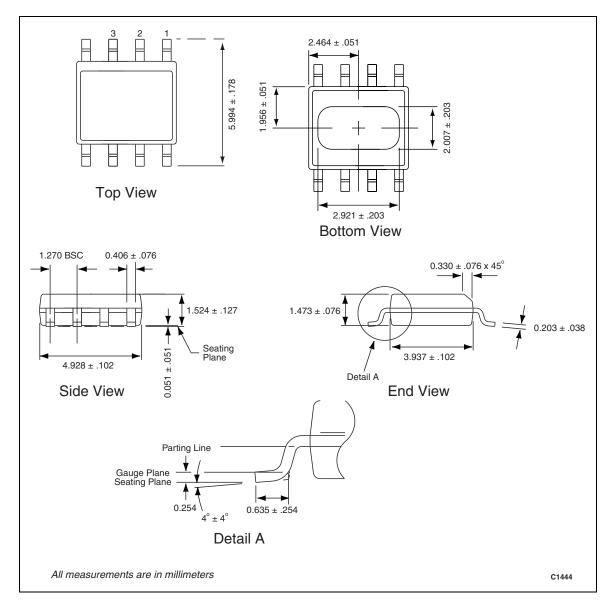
CX65003 8-Pin SOIC Package Dimensions
